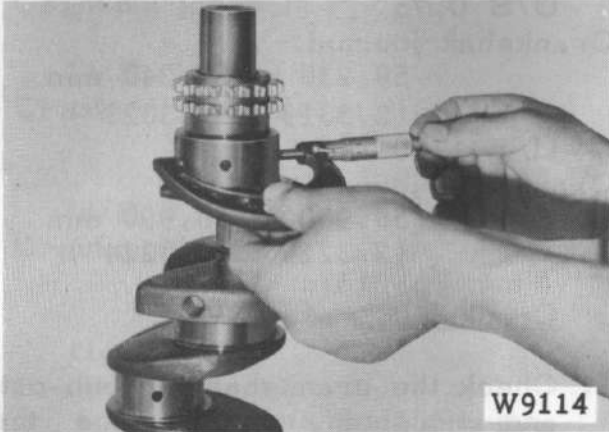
Measuring Crankpin and Main Journal Wear
